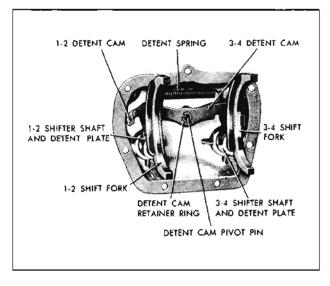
Transmission Side Cover, Shift Fork and Detent Assembly
